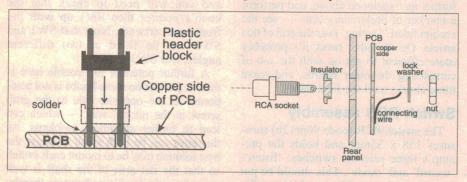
(left): Fitting the IDC header strips to the copper side of the input PCB. Fig.4 (right): How the RCA sockets and input PCB mate with the rear box panel.
